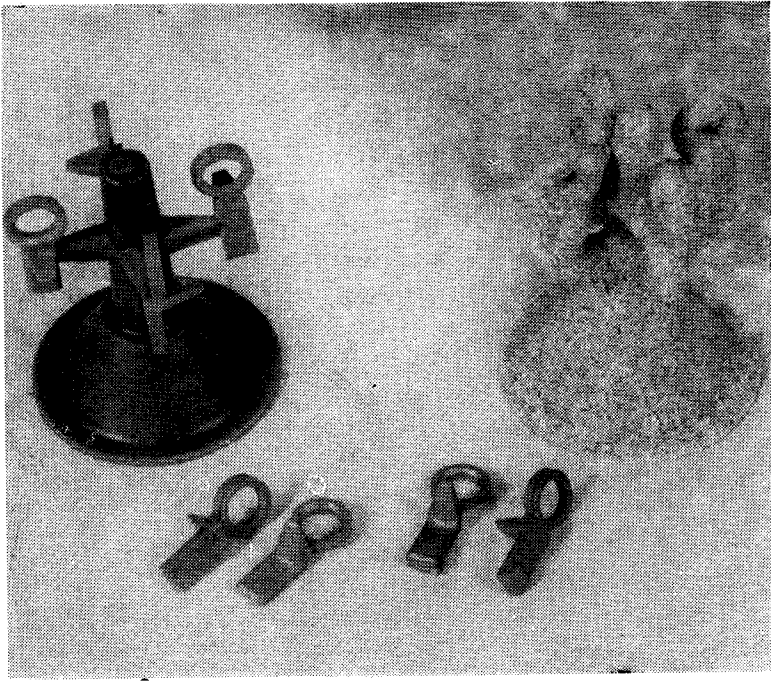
Investment cast parts : (a) Wax pattern with pouring and gating system, (b) Investment shell, and (c) Investment cast parts.
